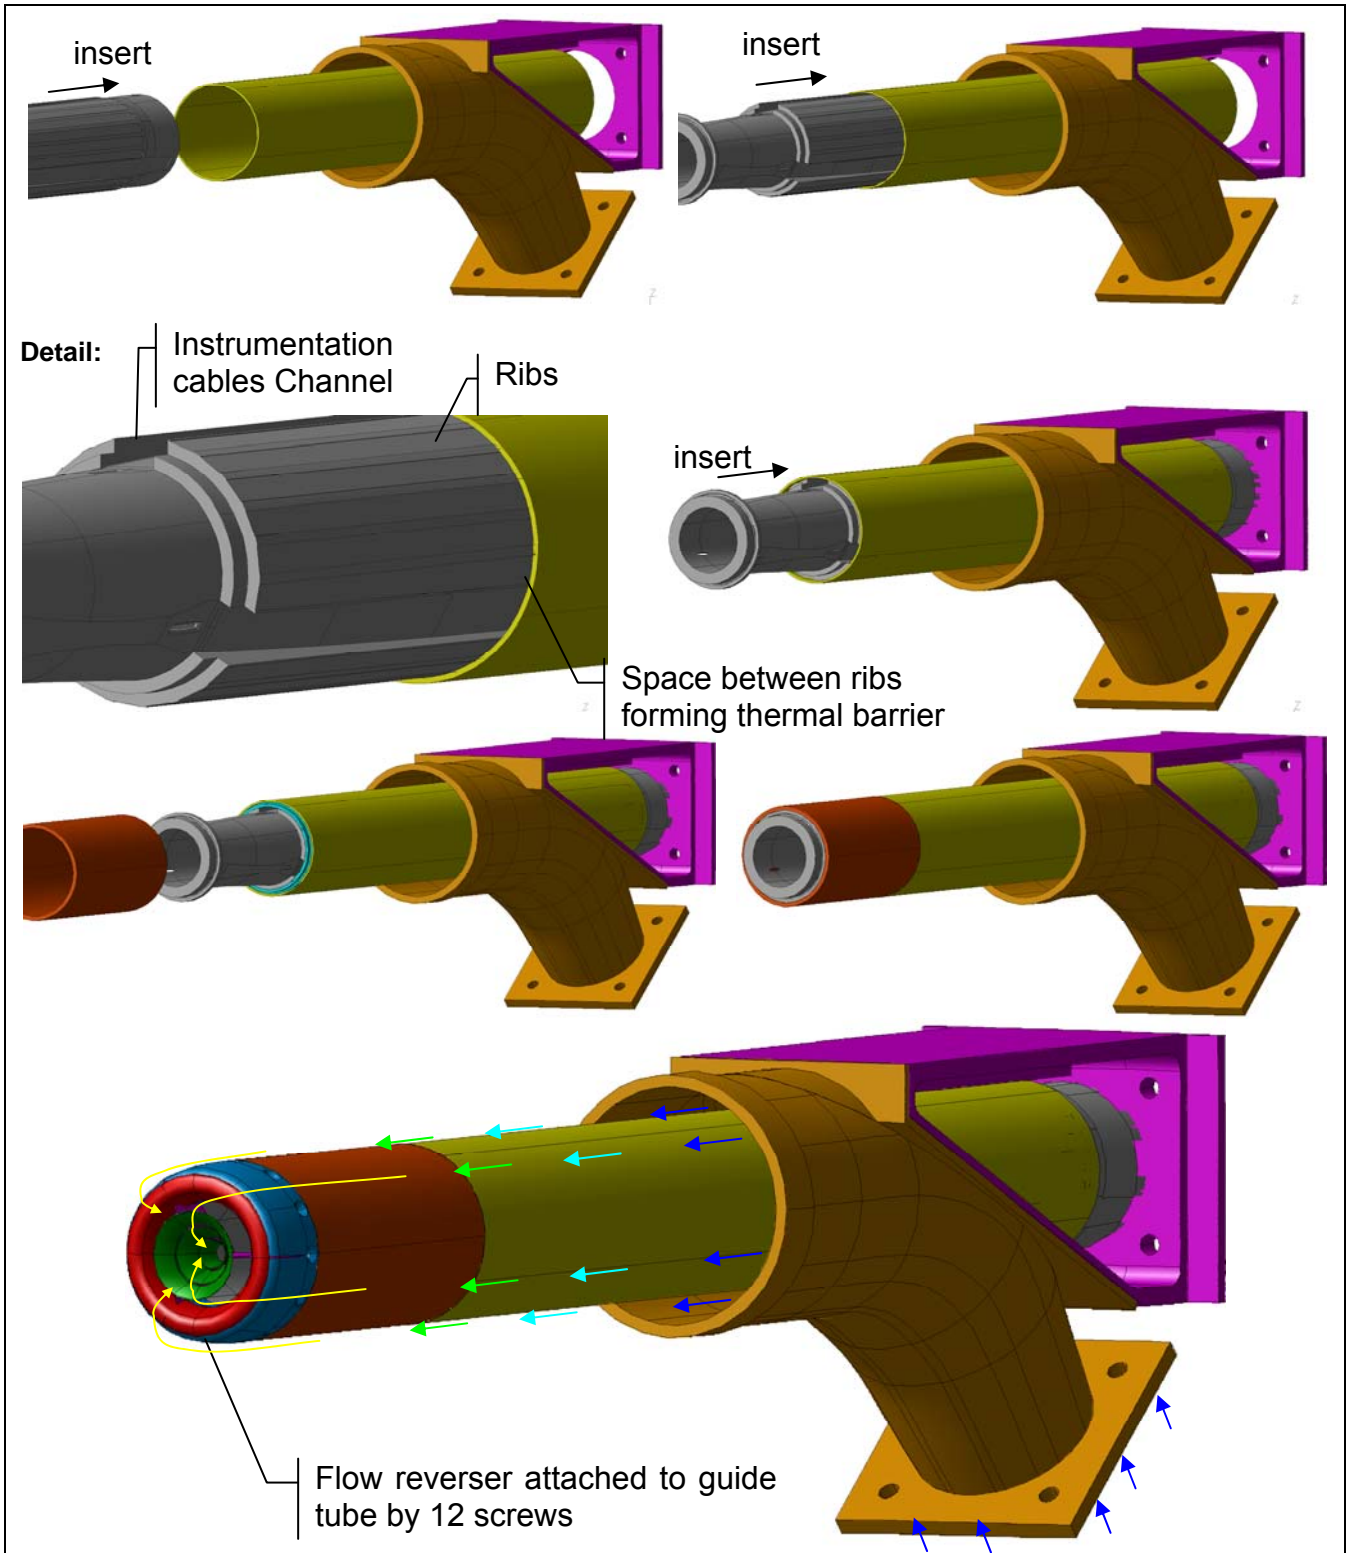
Integrating the inner guide tube (left to right, top to bottom) [Ref8]
